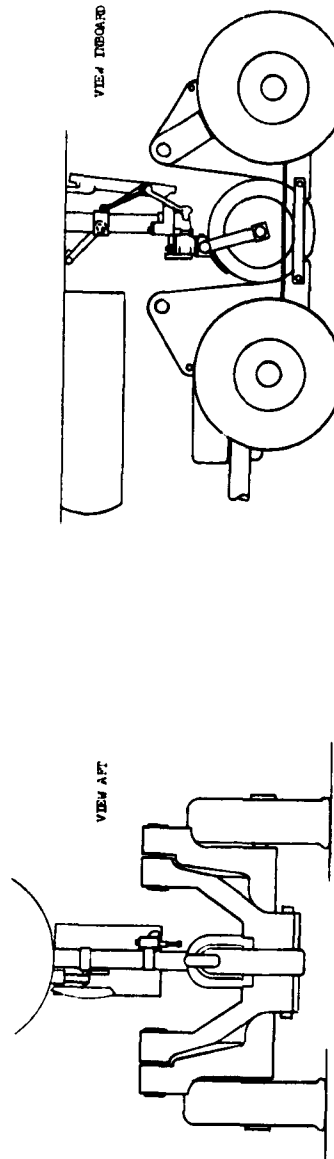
NOSE GEAR FLOATING DOLLY SHOWN WITH AIRCRAFT
